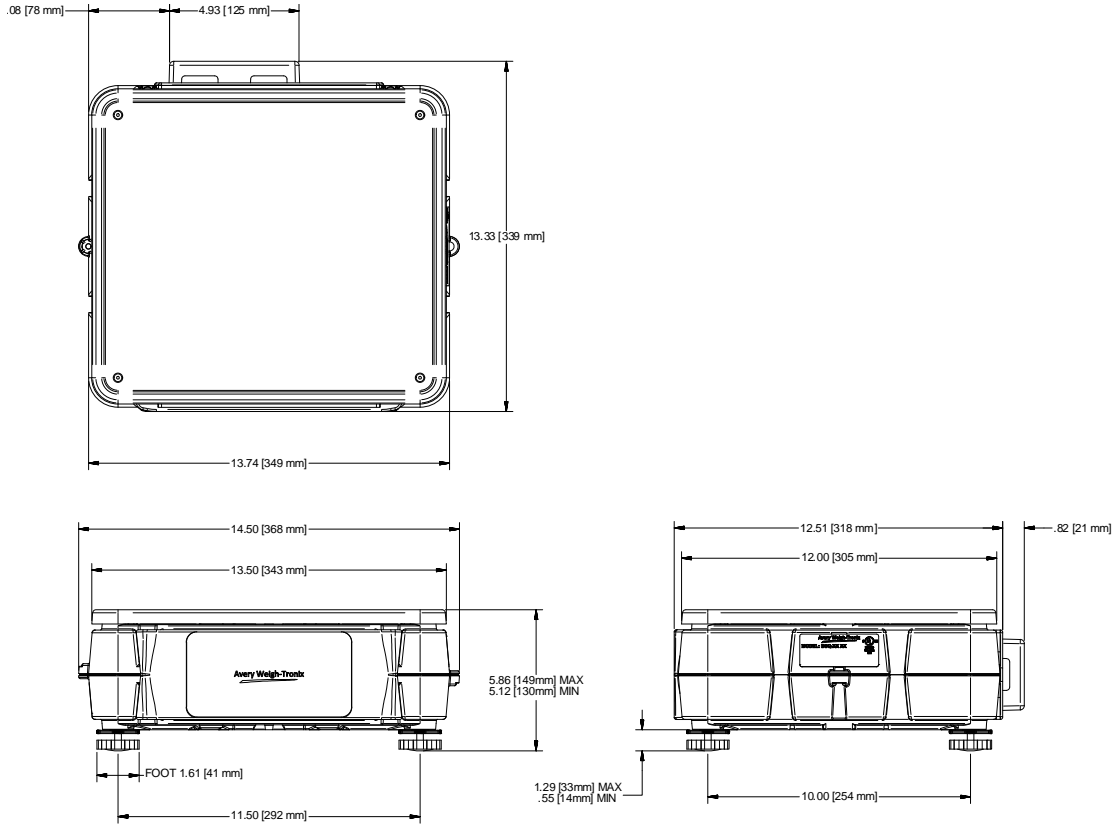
Model 1214 BSQ dimensions with PSU but no indicator
